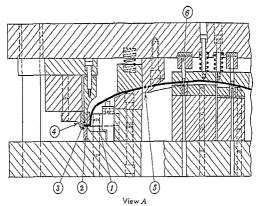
Dies for a space-heater front panel. View A, section through trimming and blanking die.
